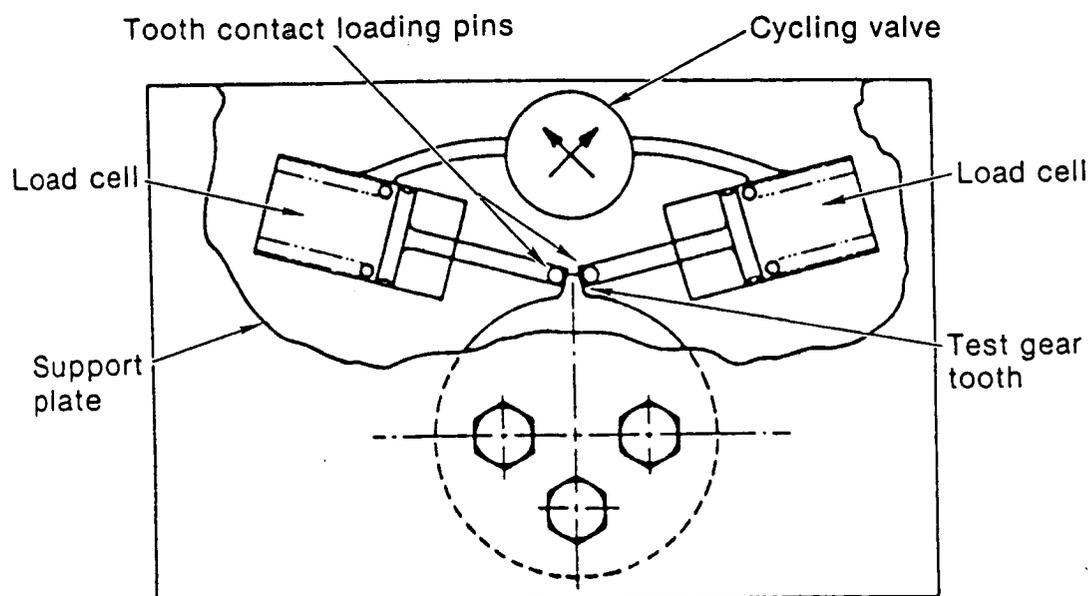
Gear Tooth Bending Fatigue Rig - This rig will be used to evaluate the bending strength of gear tooth materials. (J27638-126)
